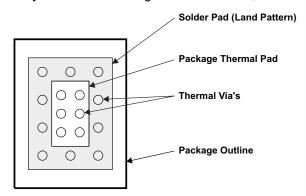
Package and PCB Land Configuration for a Multilayer PCB
